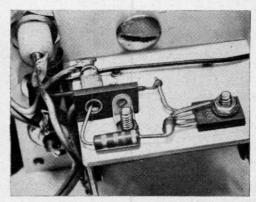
Electronic components are wired together on L bracket secured to front plate of the box.
